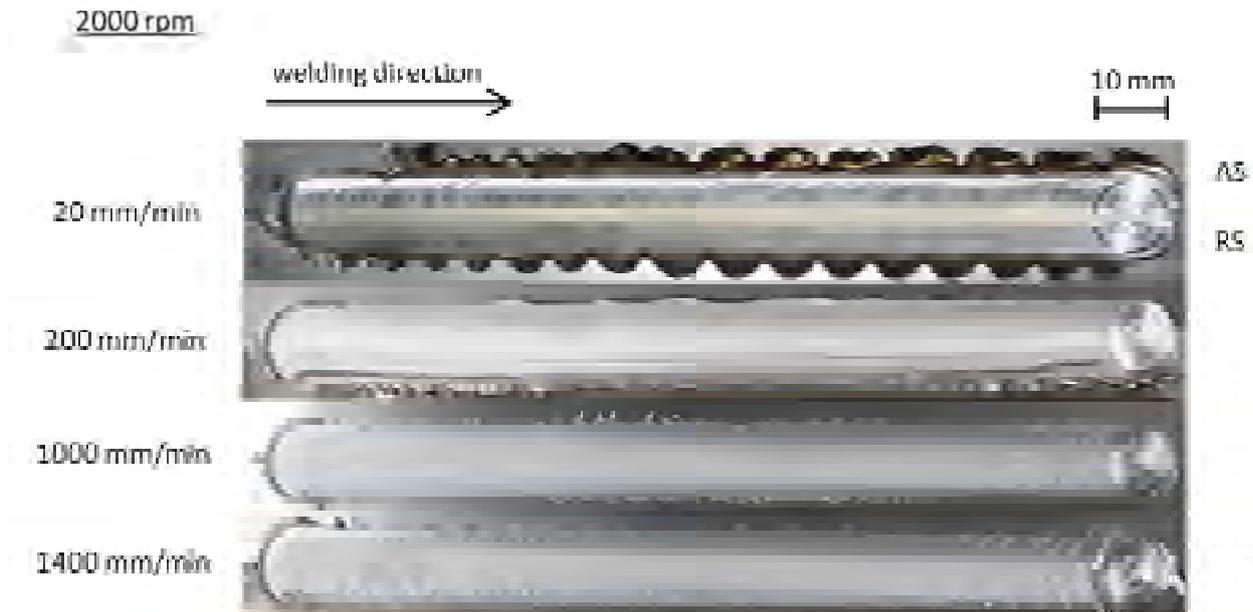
surface appearance of FSW of extruded AZ31 for different welding speeds at constant rotational speed.
